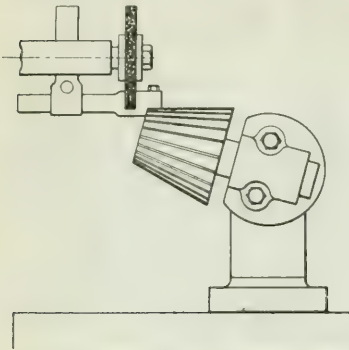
GRINDING BEVEL CUTTERS WITH DISC WHEEL.
